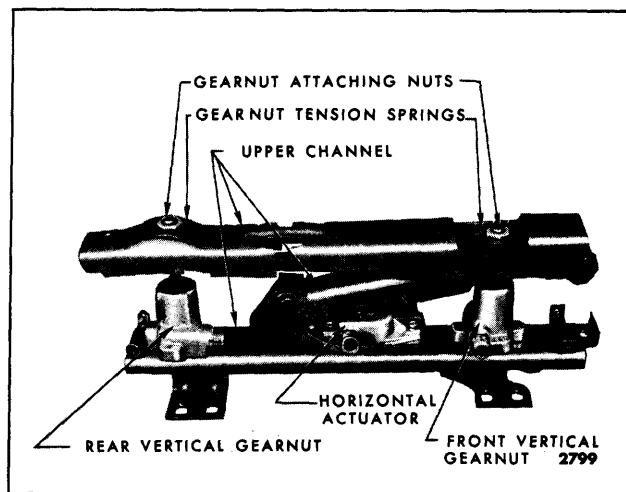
Six-Way Seat Adjuster - "B, C & E" Styles
